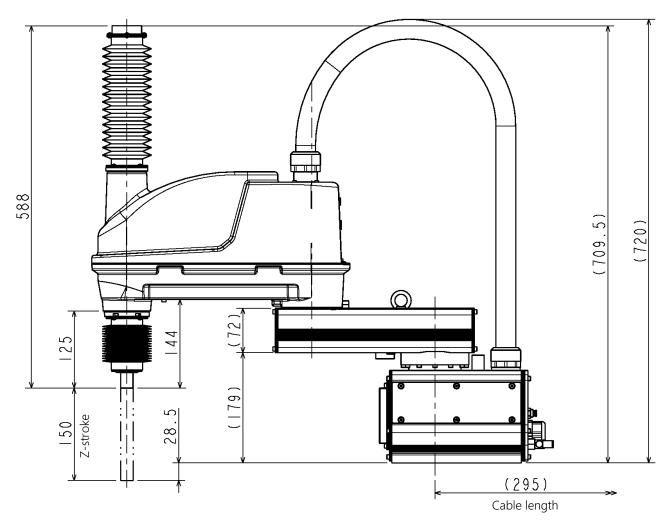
Robot Dimensions (KHL-500 Model with Dust-proof Specifications)
